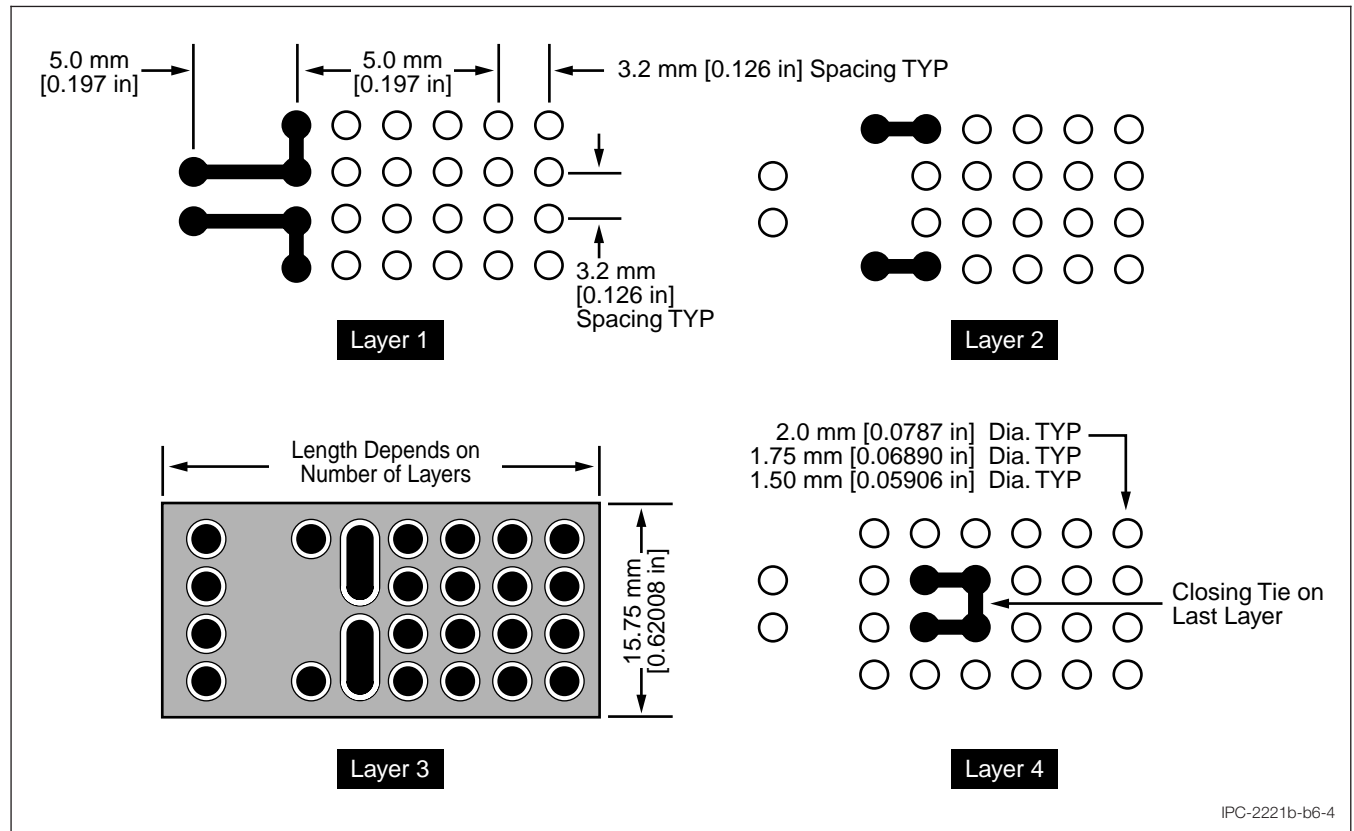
Test Coupon D for Process Control of 4 Layer Printed Boards
